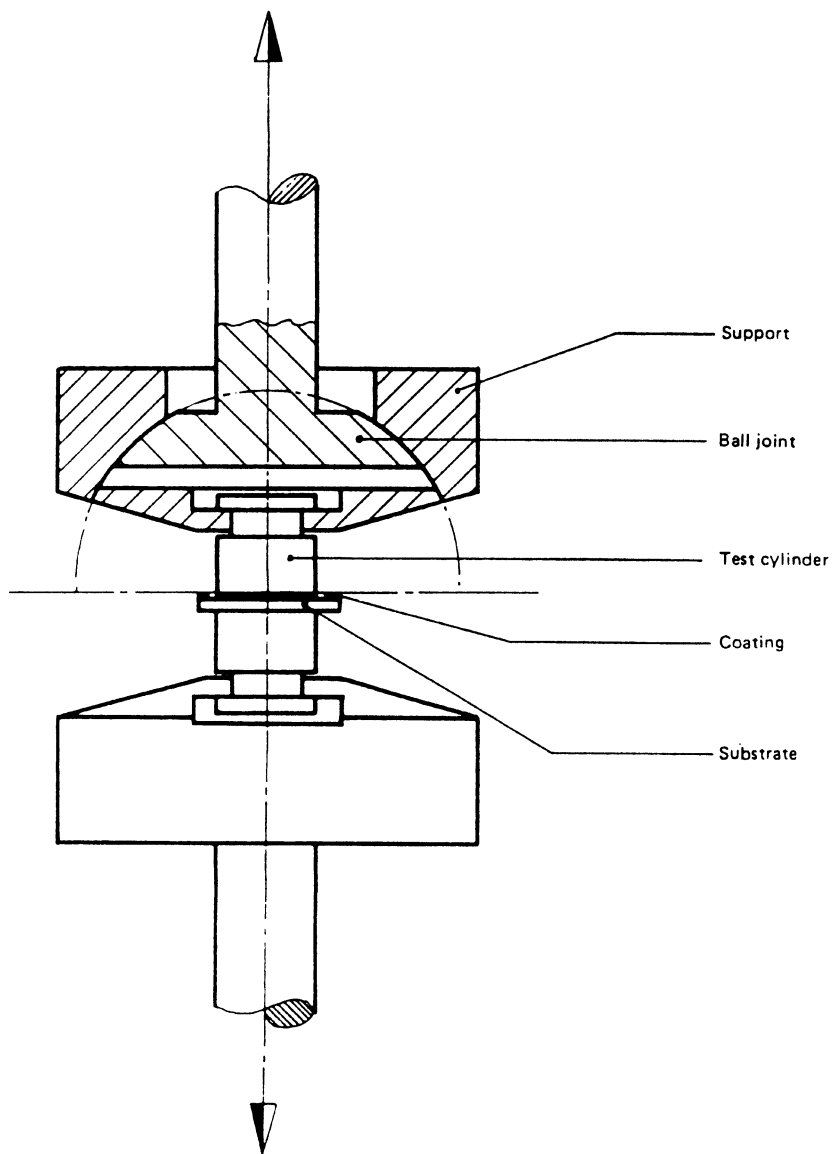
Example of a suitable test apparatus for methods specified in 7.3.1 and 7.3.3
